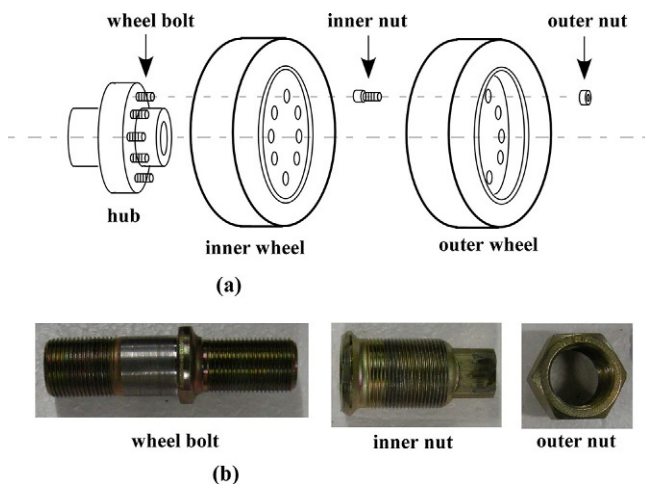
(A) Tightening sequence of rear wheel and (B) dedicated threaded fasteners for large vehicles.
